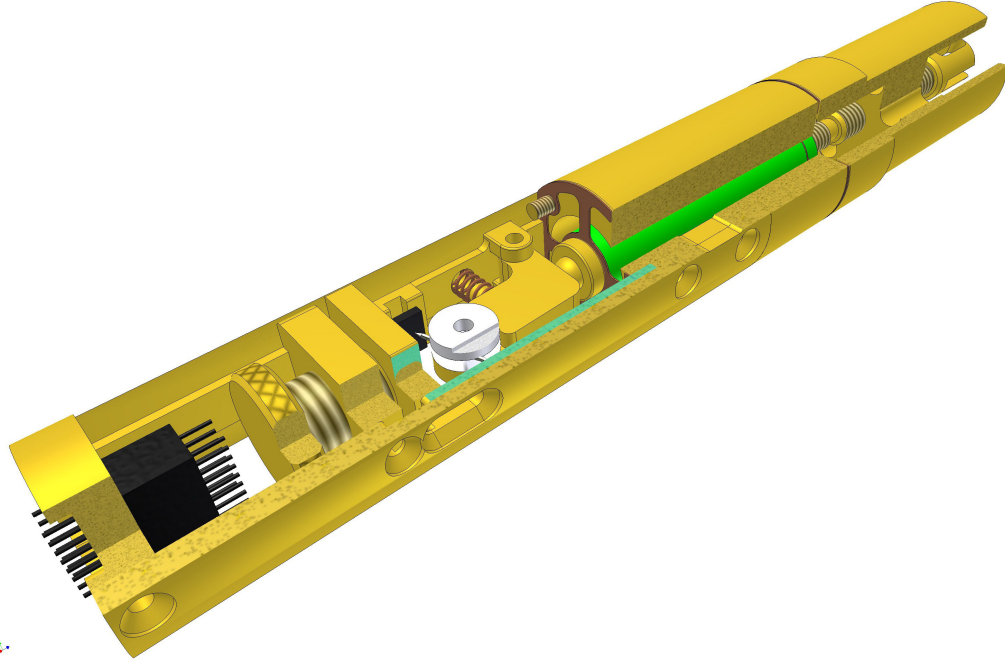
CAD drawing showing the layout and construction of a point contact insert designed for field in-plane measurements. Also visible is the differential screw system within the body of the insert.
